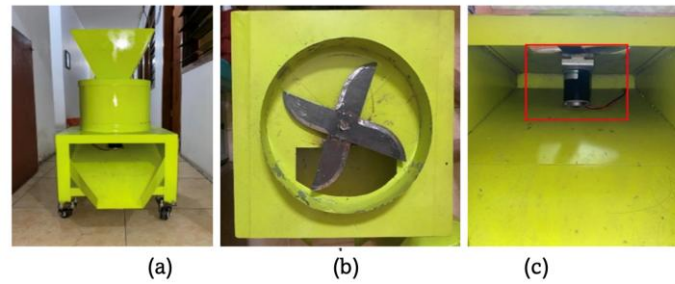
Shredder Machine (a) Machine Frame (b) Shredding Blade (c) Drive Motor
